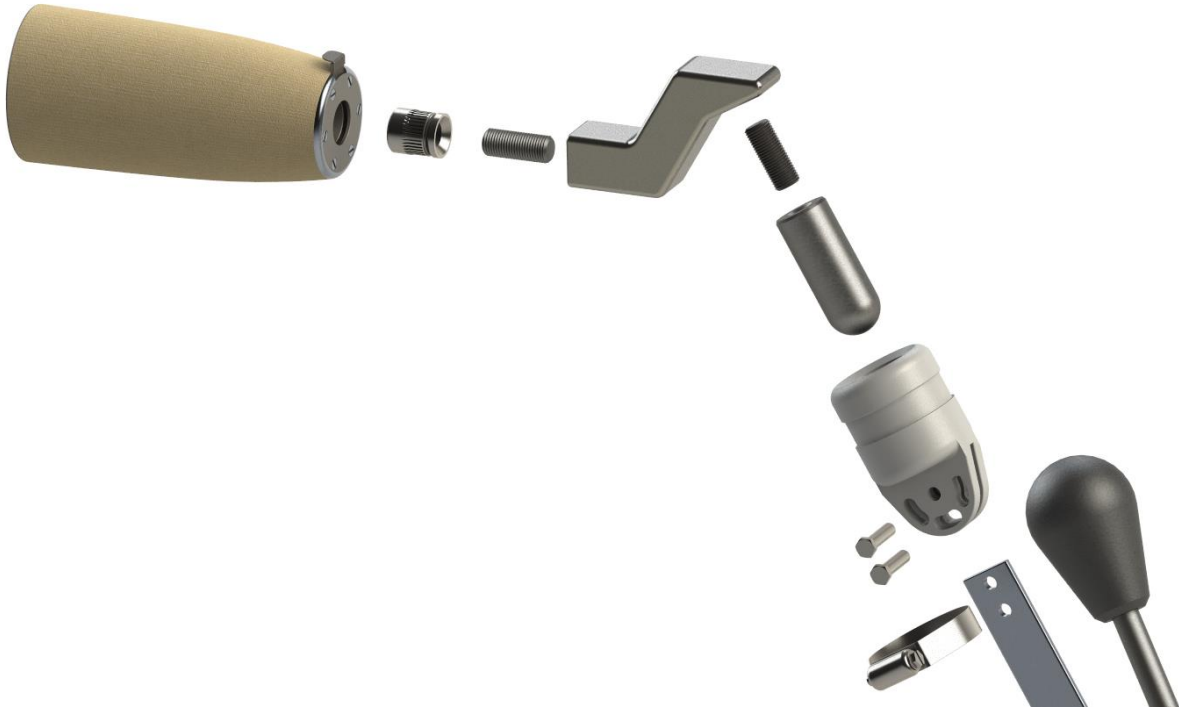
Exploded view of the final design, showing a prosthetic socket and a tractor control
